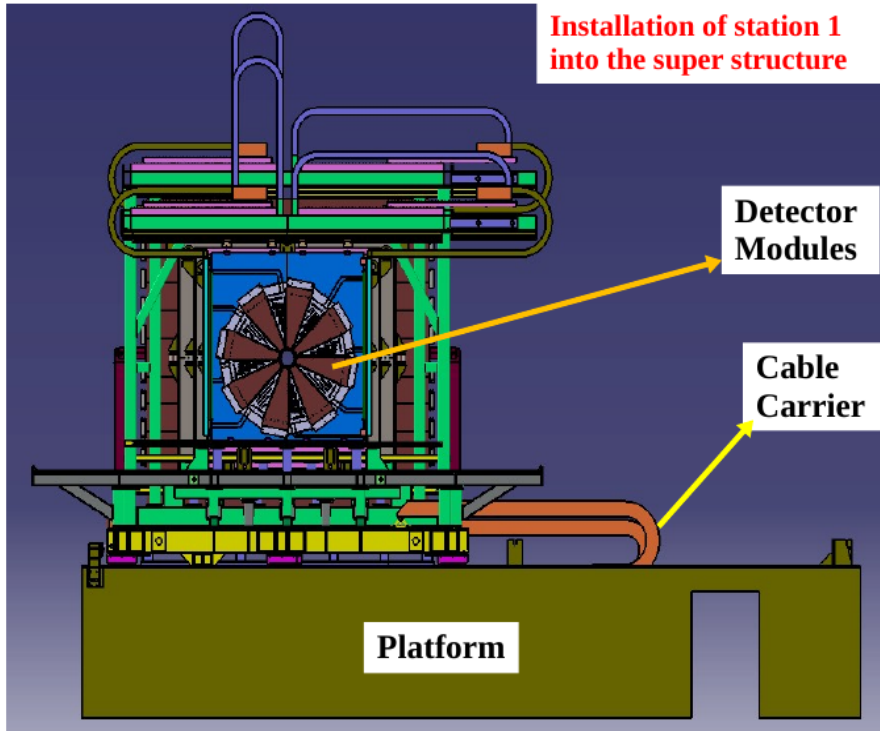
Mechanical layout of MuCh setup. Detector stations will be installed on super structure as shown. Cable carriers will be used for handling cables.
